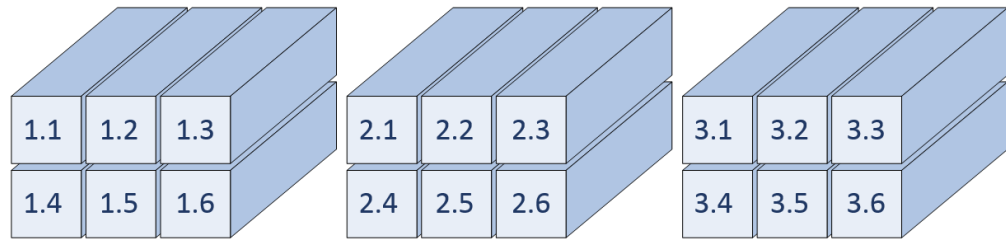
Schematic giving position references from larger samples, for wire-EDM test pieces.
